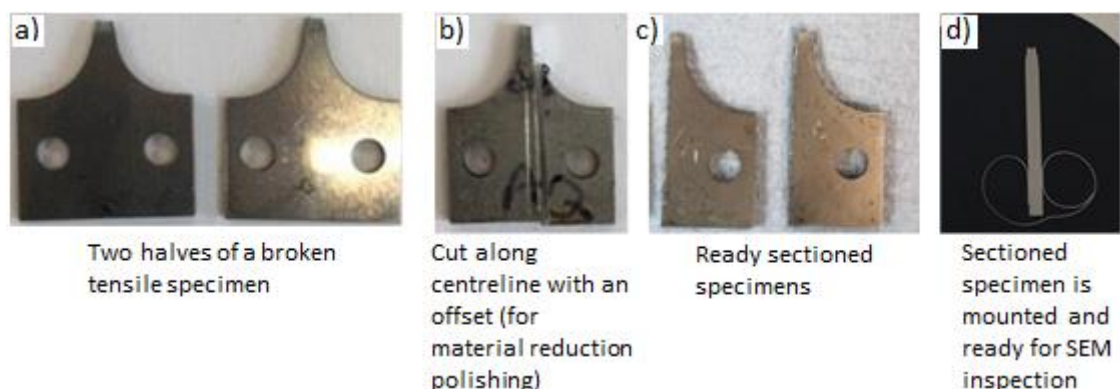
Example of a broken tensile specimens prepared for damage inspection in the cross-section.
